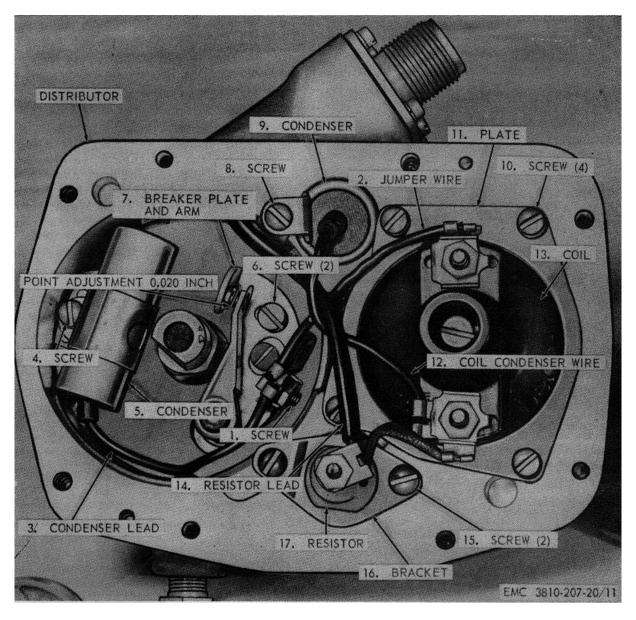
Distributor, coil, points, condenser, and resistor, removal, adjustment, and installation.
